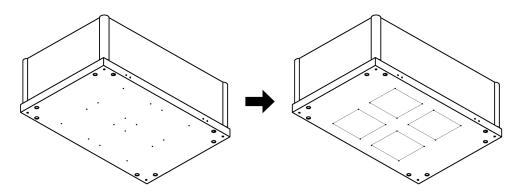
Drawing rectangular boxes on the underside of the Base Assembly To identify the internal ribs (you can drill inside those squares).
